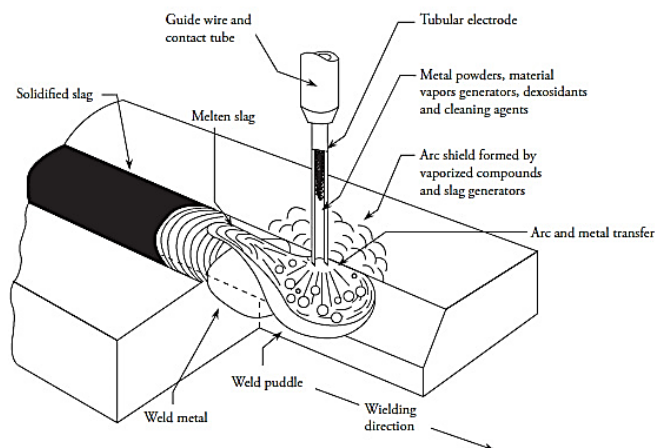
Flux Cord Arc Welding (FCAW) diagram (Journal, 2009)
